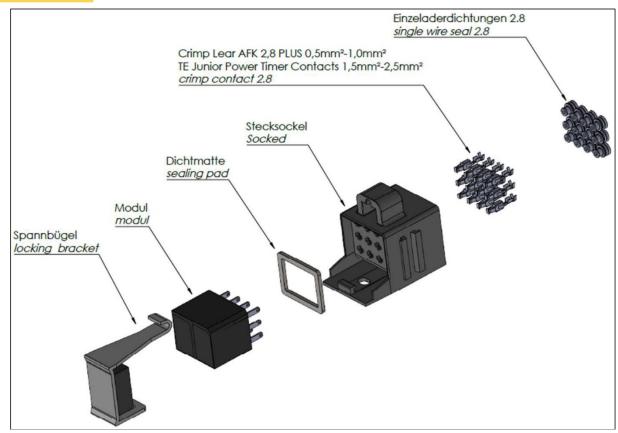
Exploded assembly drawing for the watertight socket (for module 1.017.055).
